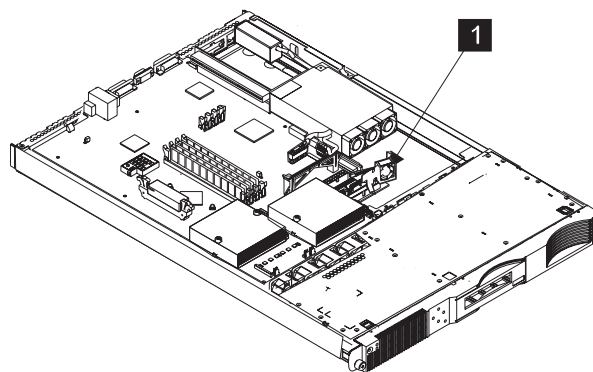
Removing a SAN Volume Controller 2145-4F2 disk drive fan
